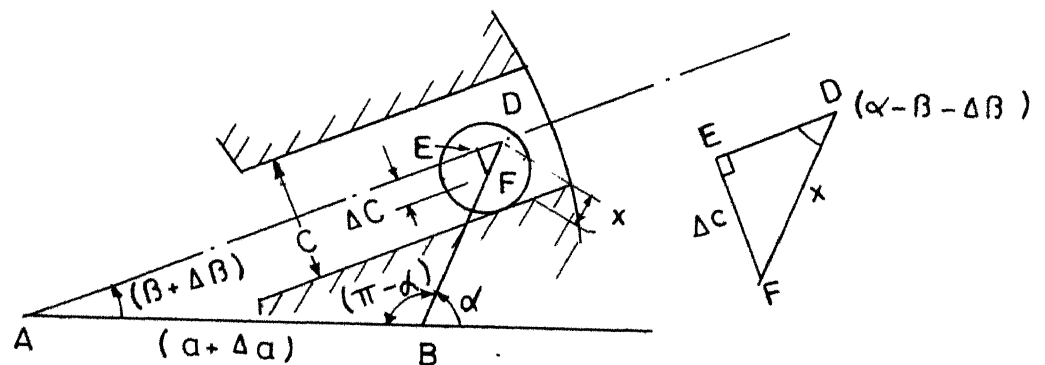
d INTERNAL GENEVA MECHANISM WITH TOLERANCES
